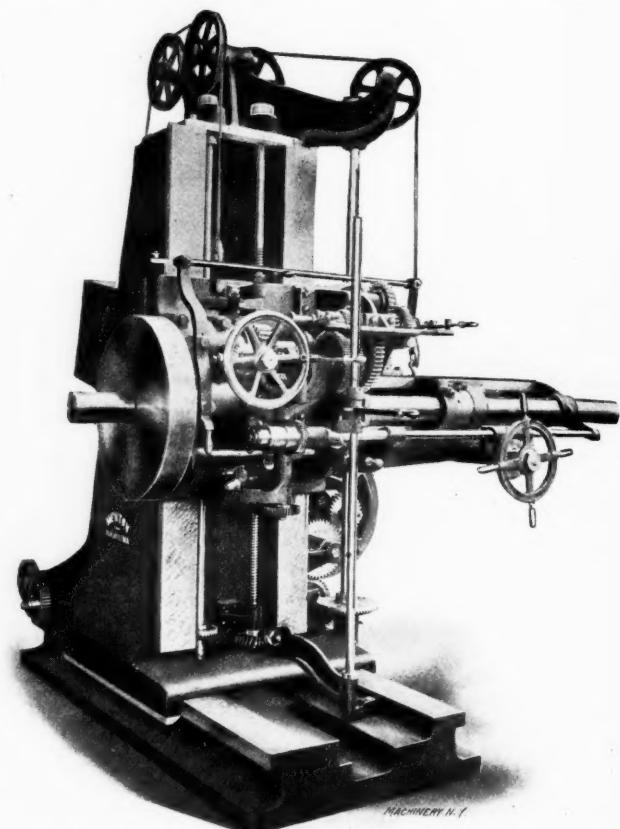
Newton Horizontal Boring, Drilling and Milling Machine.
